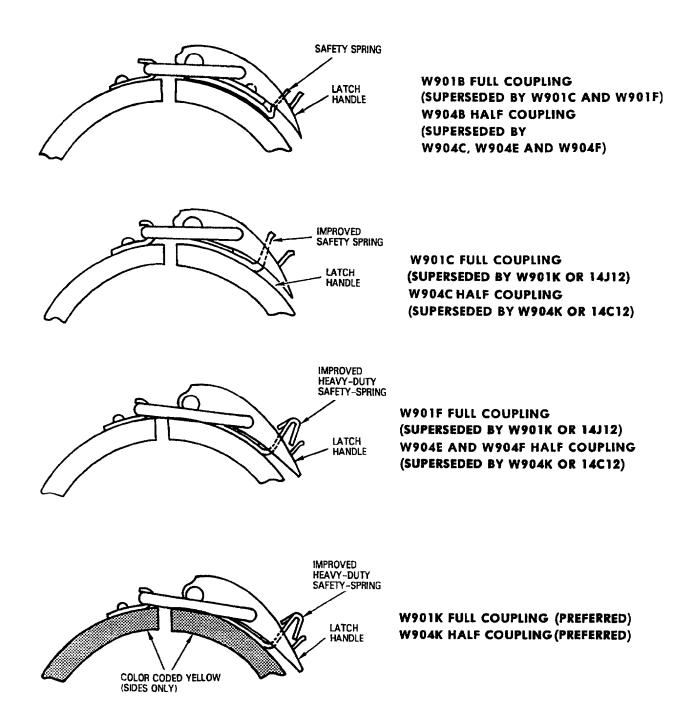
Fuel System Couplings and Bulkhead Connectors (Sheet 1)
